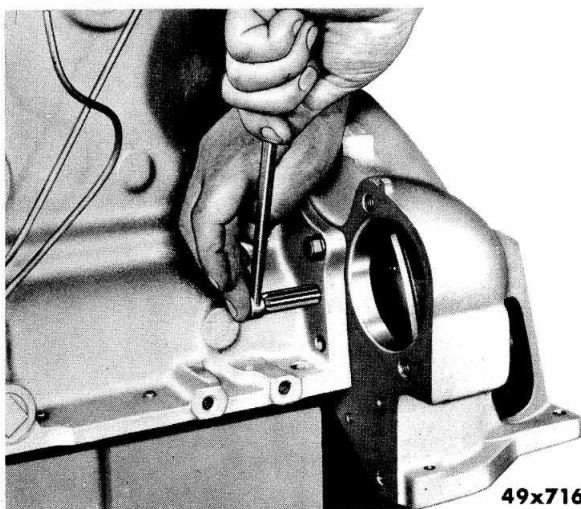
Reaming Dowel Pin Holes, Using Tool C-860
